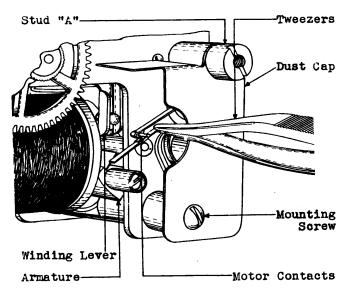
Method of Adjusting Motor Contacts with Tweezers
